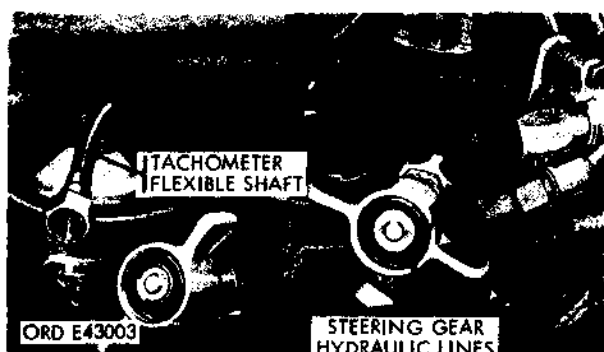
Steering gear hydraulic lines and tachometer drive cable (disconnected) at left side of engine.
